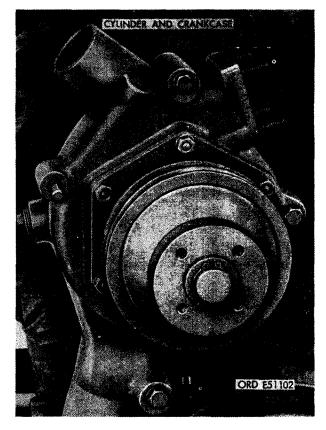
REMOVING OR INSTALLING WATER PUMP ASSEMBLY.
